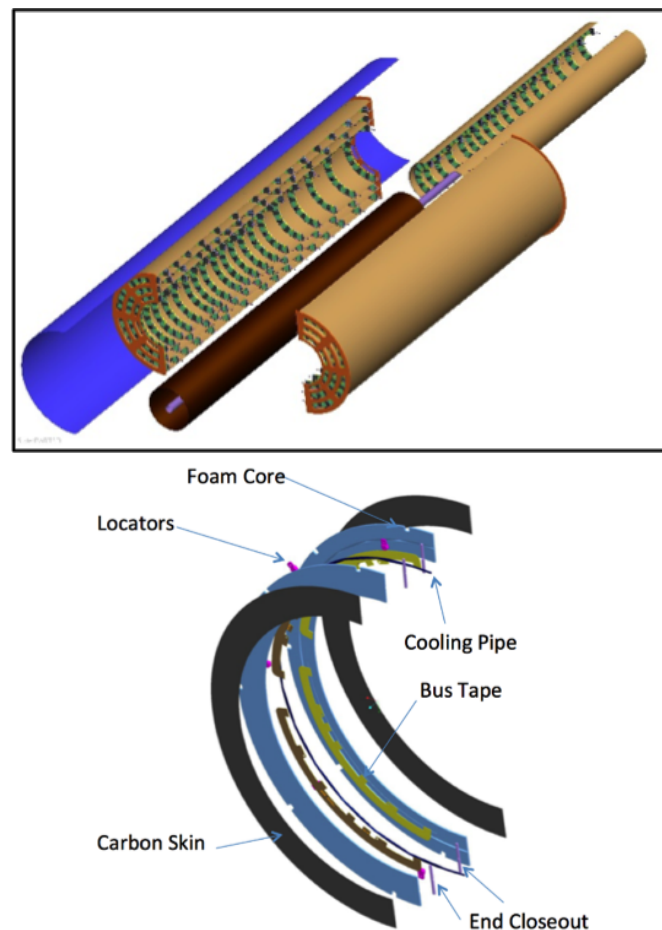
Top: Ring endcap concept: modules (shown in green) are mounted on half-rings which are in turn mounted inside cylindrical layers (light brown). Bottom: Exploded view of the ring mechanical assembly. [2]
